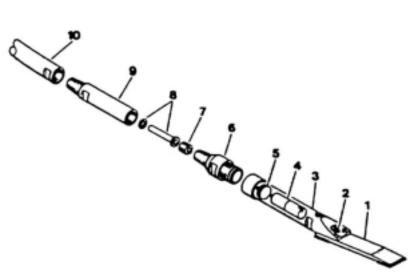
General HDD Drill Head Assembly.⁽²¹⁾
